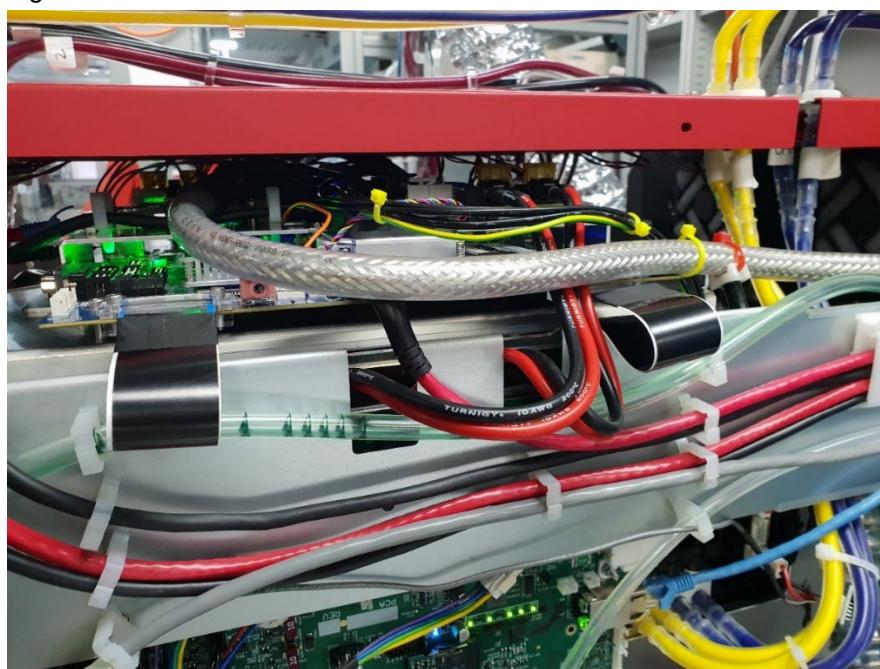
Print Module Power Cable – Cables routed out SUPPLY tube side
